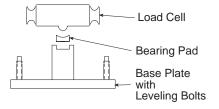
Base Plate, Bearing Pad, and Load Cell Assembly
